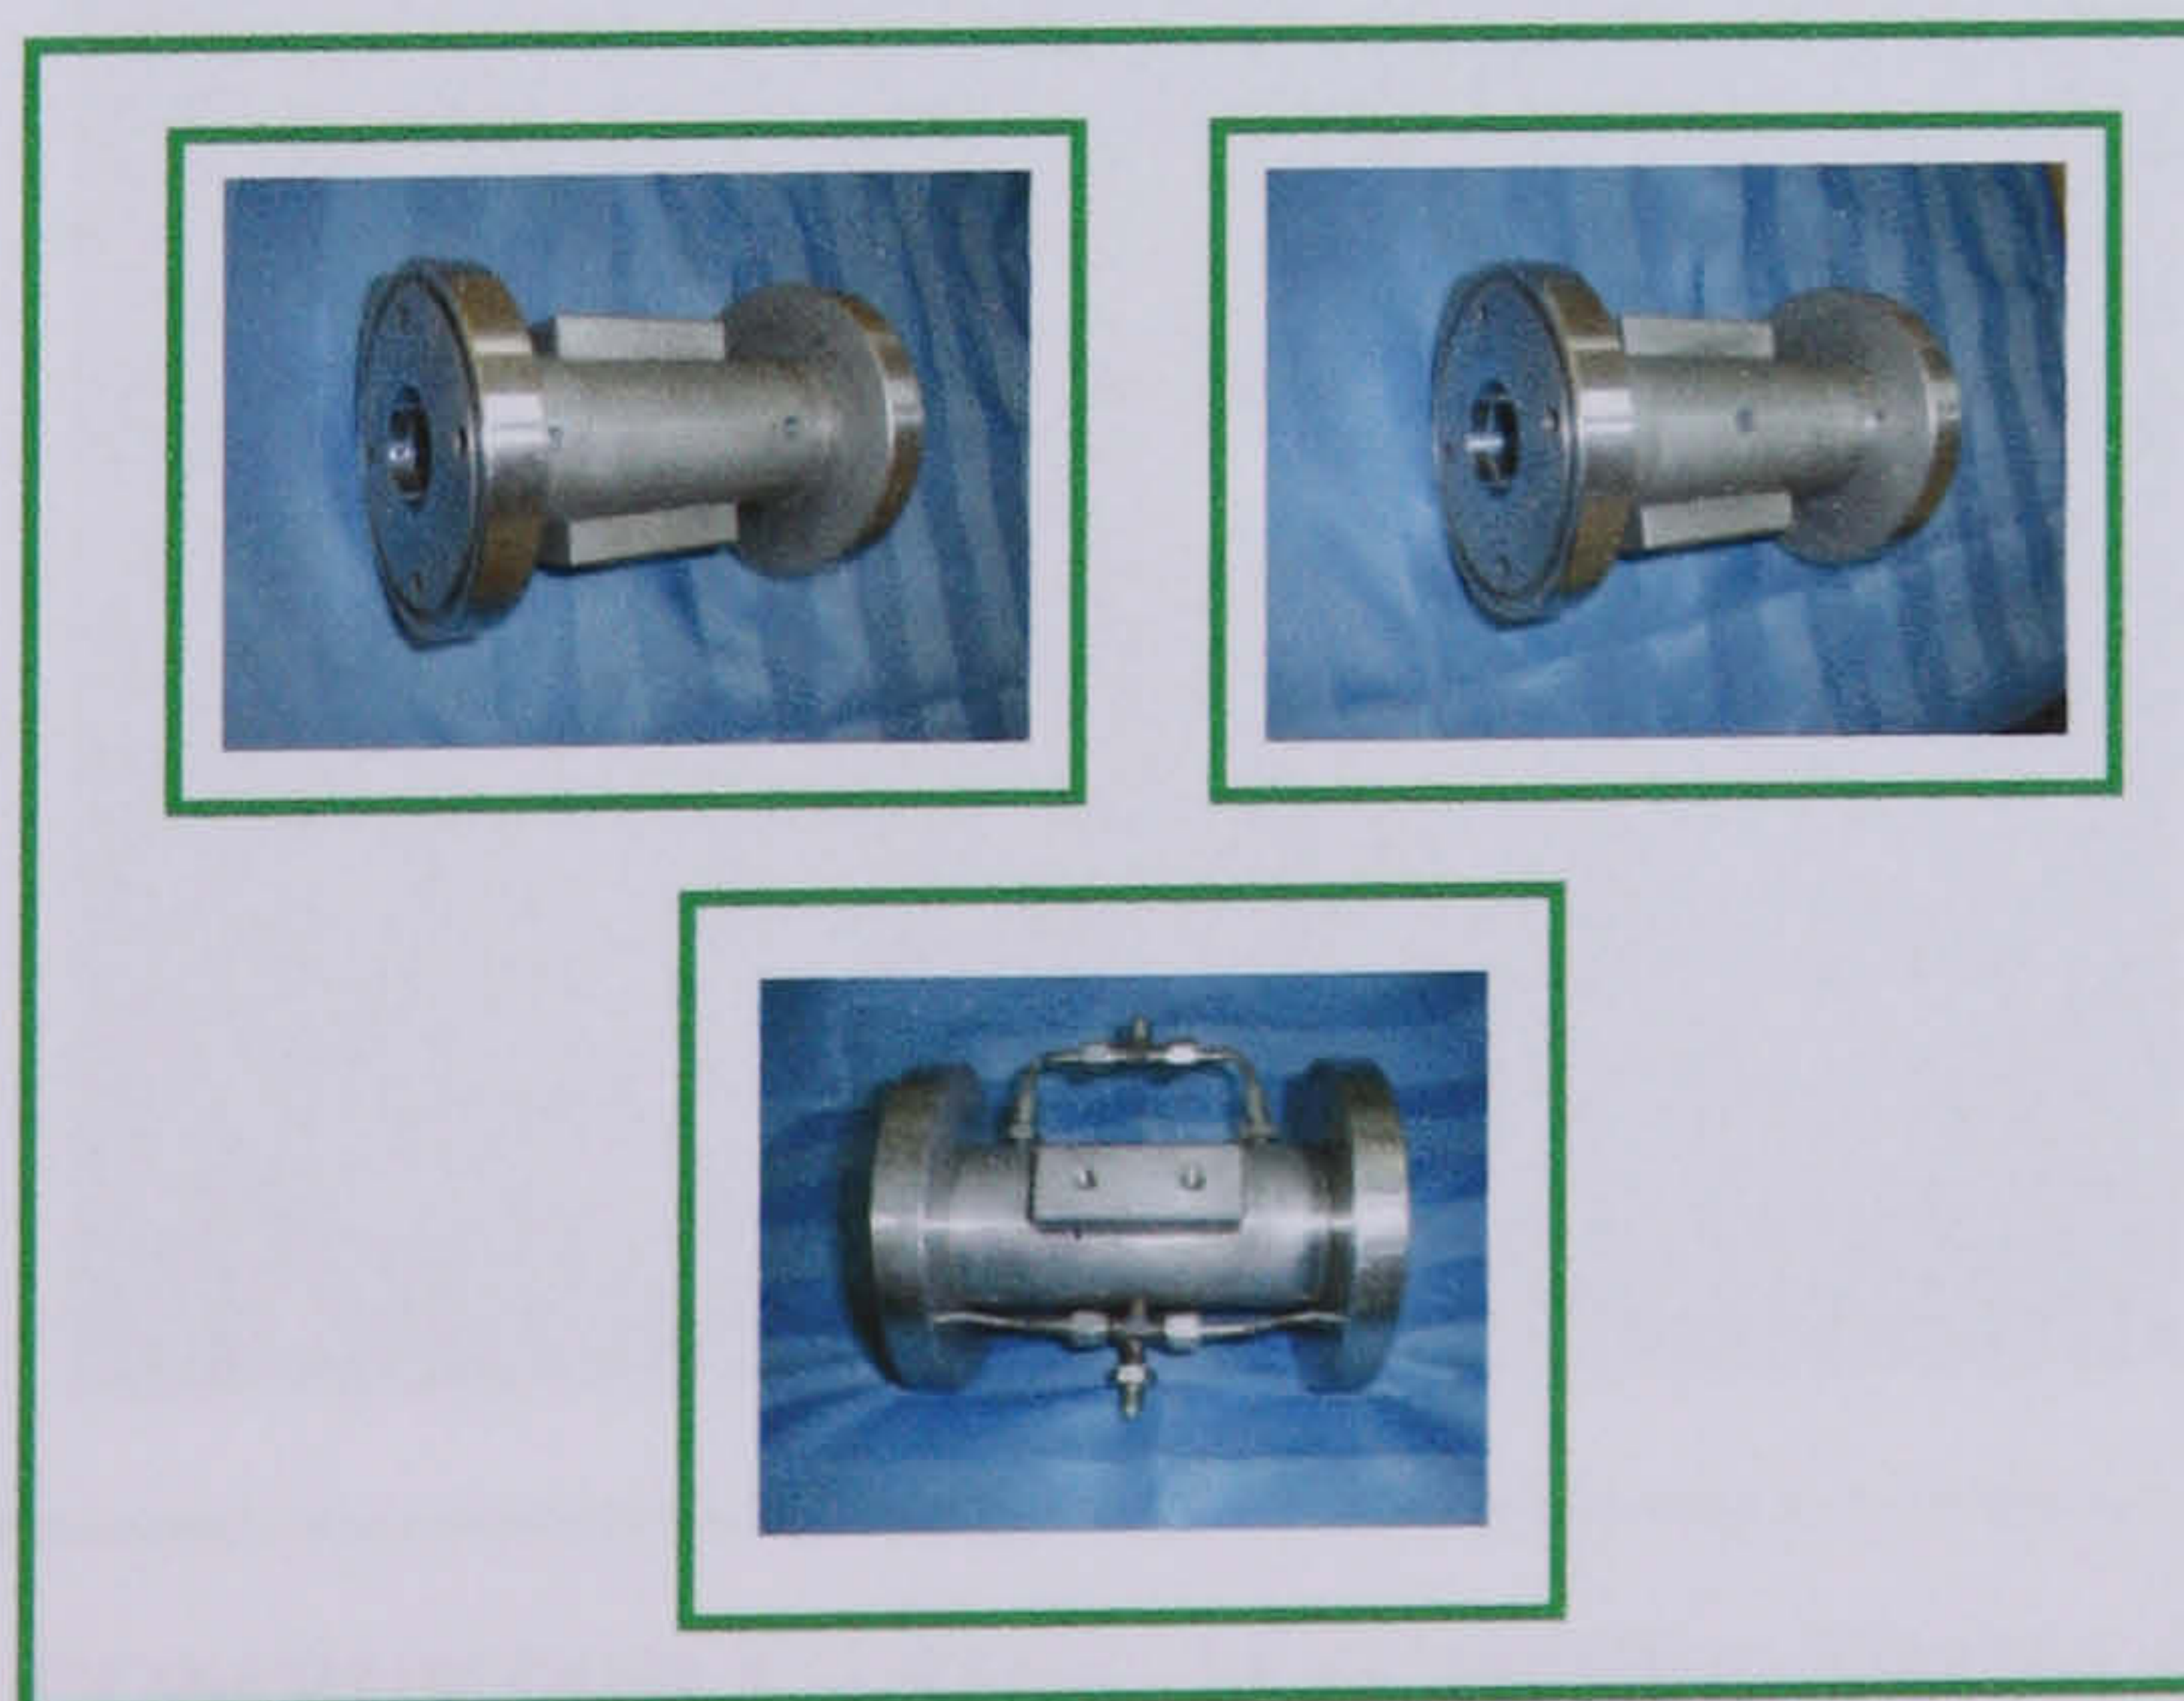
BEARING HOUSING MACHINED FROM STAINLESS STEEL ALLOY, H900 INCLUDING THE OIL PORTS FOR LUBRICATIONS
